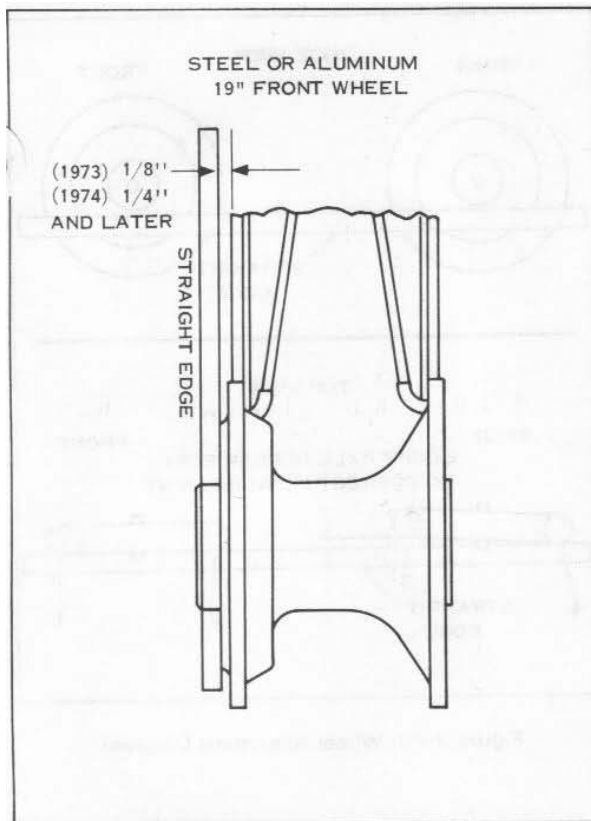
Aligning Front Wheel with Straightedge (1973 and Later)
